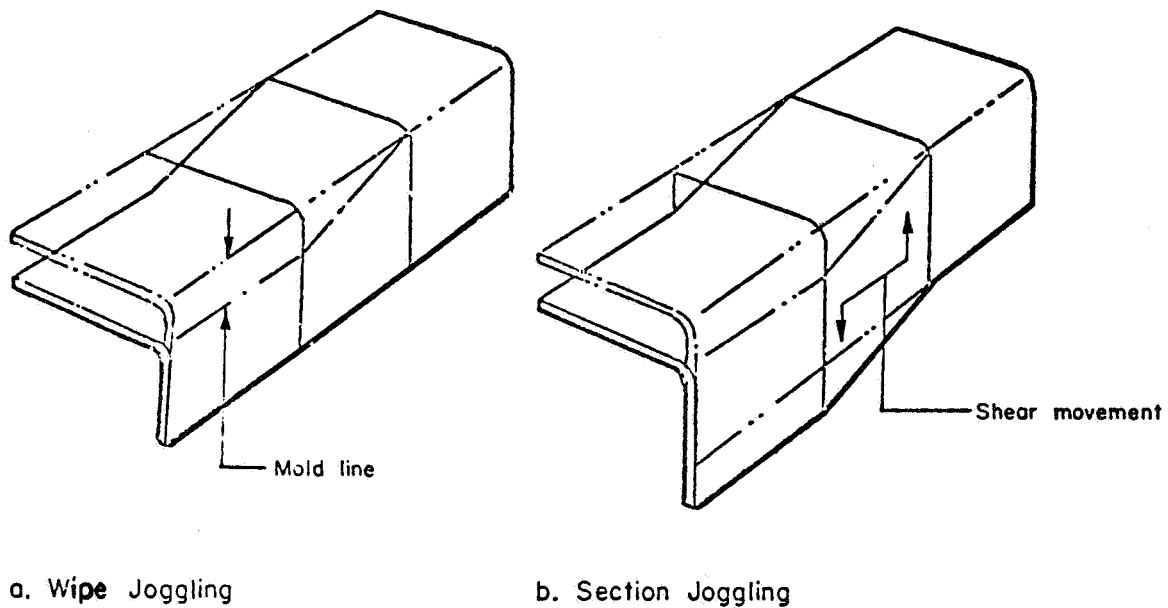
BASIC METHODS OF FORMING JOGGLES (REF. 44)
